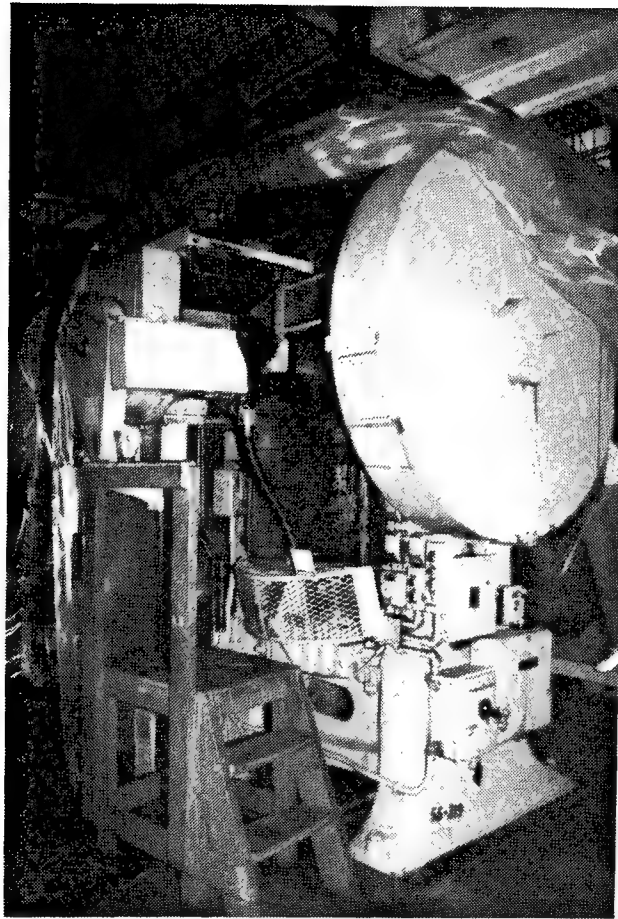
Building 3A: Case Taper Machine manufactured by E. W. Bliss Co.
